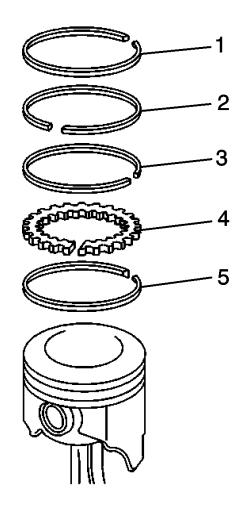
Piston Rings Courtesy of GENERAL MOTORS COMPANY
